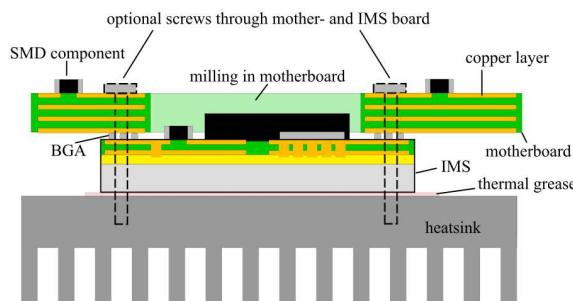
Schematic cross-section of a hybrid PCB-IMS construction with SMD components and the BGA solder joints between the motherboard and IMS board
